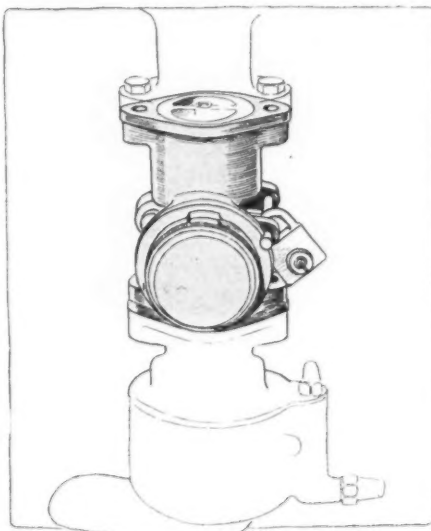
Kramer self-contained engine governor, which is placed between the carburetor and the intake pipe
